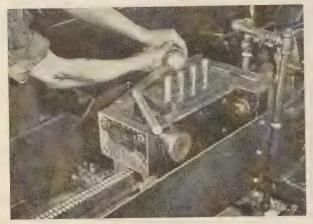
Formation of Tongue on the End of the Countershaft, Handled on a Horizontal Broaching Machine
